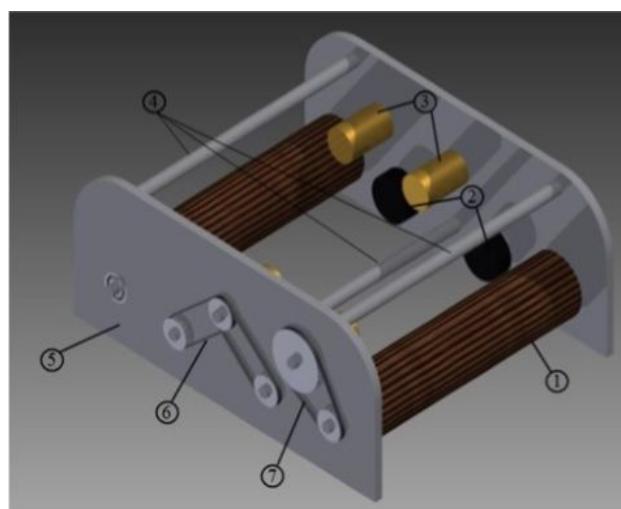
The cleaning robot system (1. brush, 2. wheels, 3. motors, 4. connecting aluminum rods, 5. side panel, 6. wheel driving system, 7. brush driving system)
